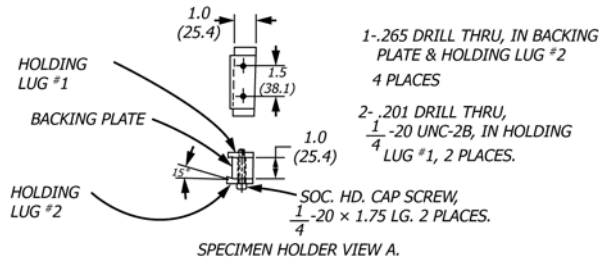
Dry Sand/Rubber Wheel Abrasion Test Apparatus
